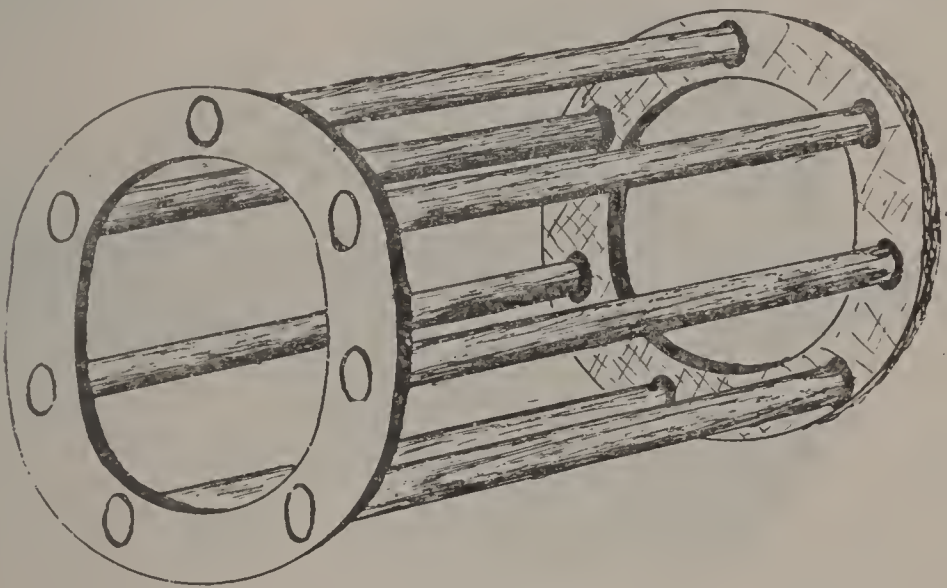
SQUIRREL-CAGE ROTOR WINDING.
